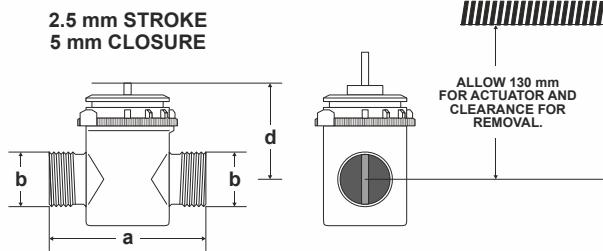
Three-way valves with bypass, dimensions (mm)
